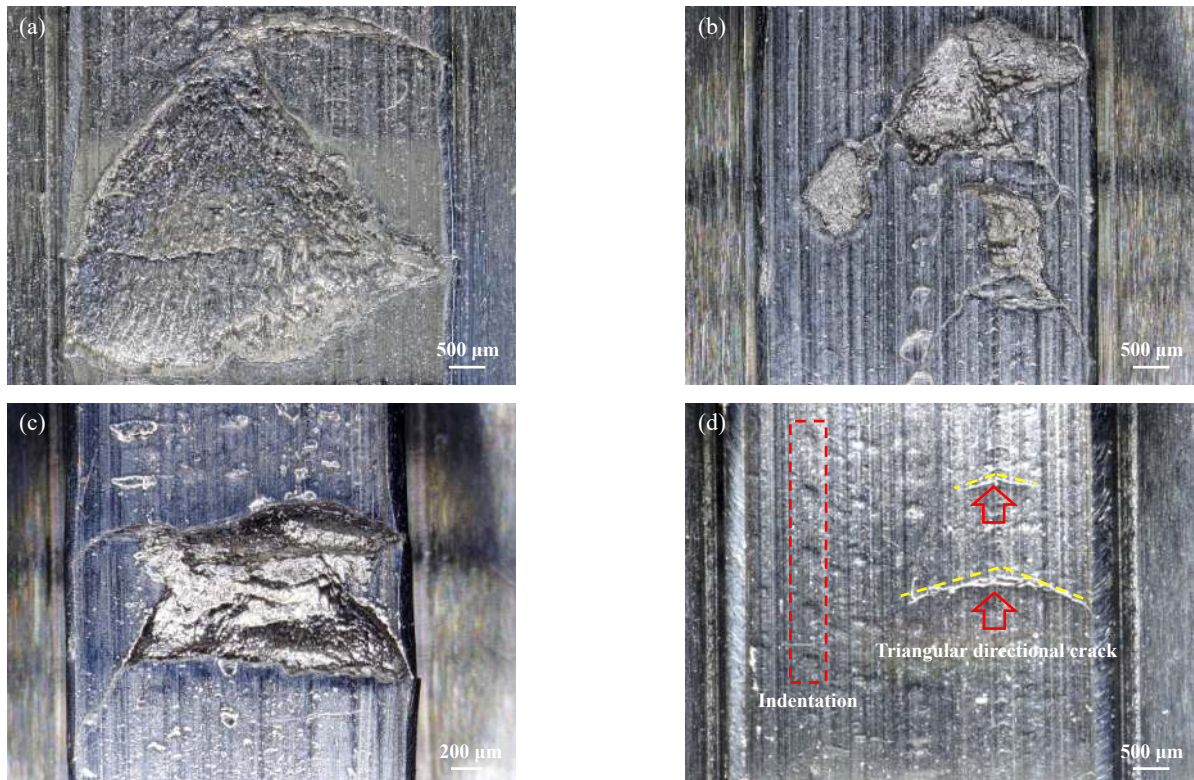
Surface morphology of the damaged standard rolling contact fatigue sample
